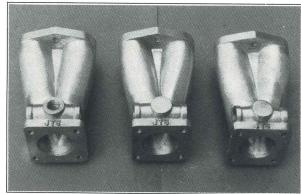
The 3 manifolds machined and ready for fitting to the head.
